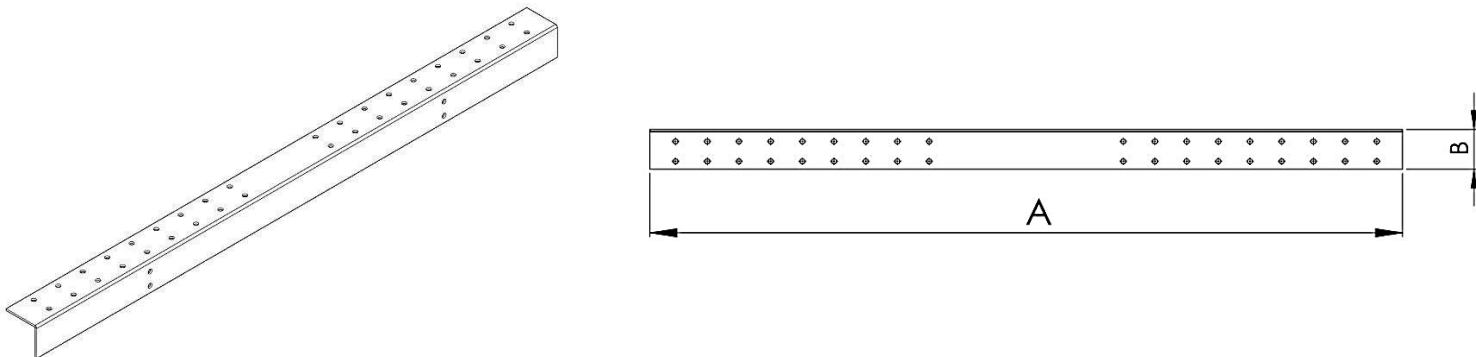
Single Cross Ground Support and Walkway Fittings
